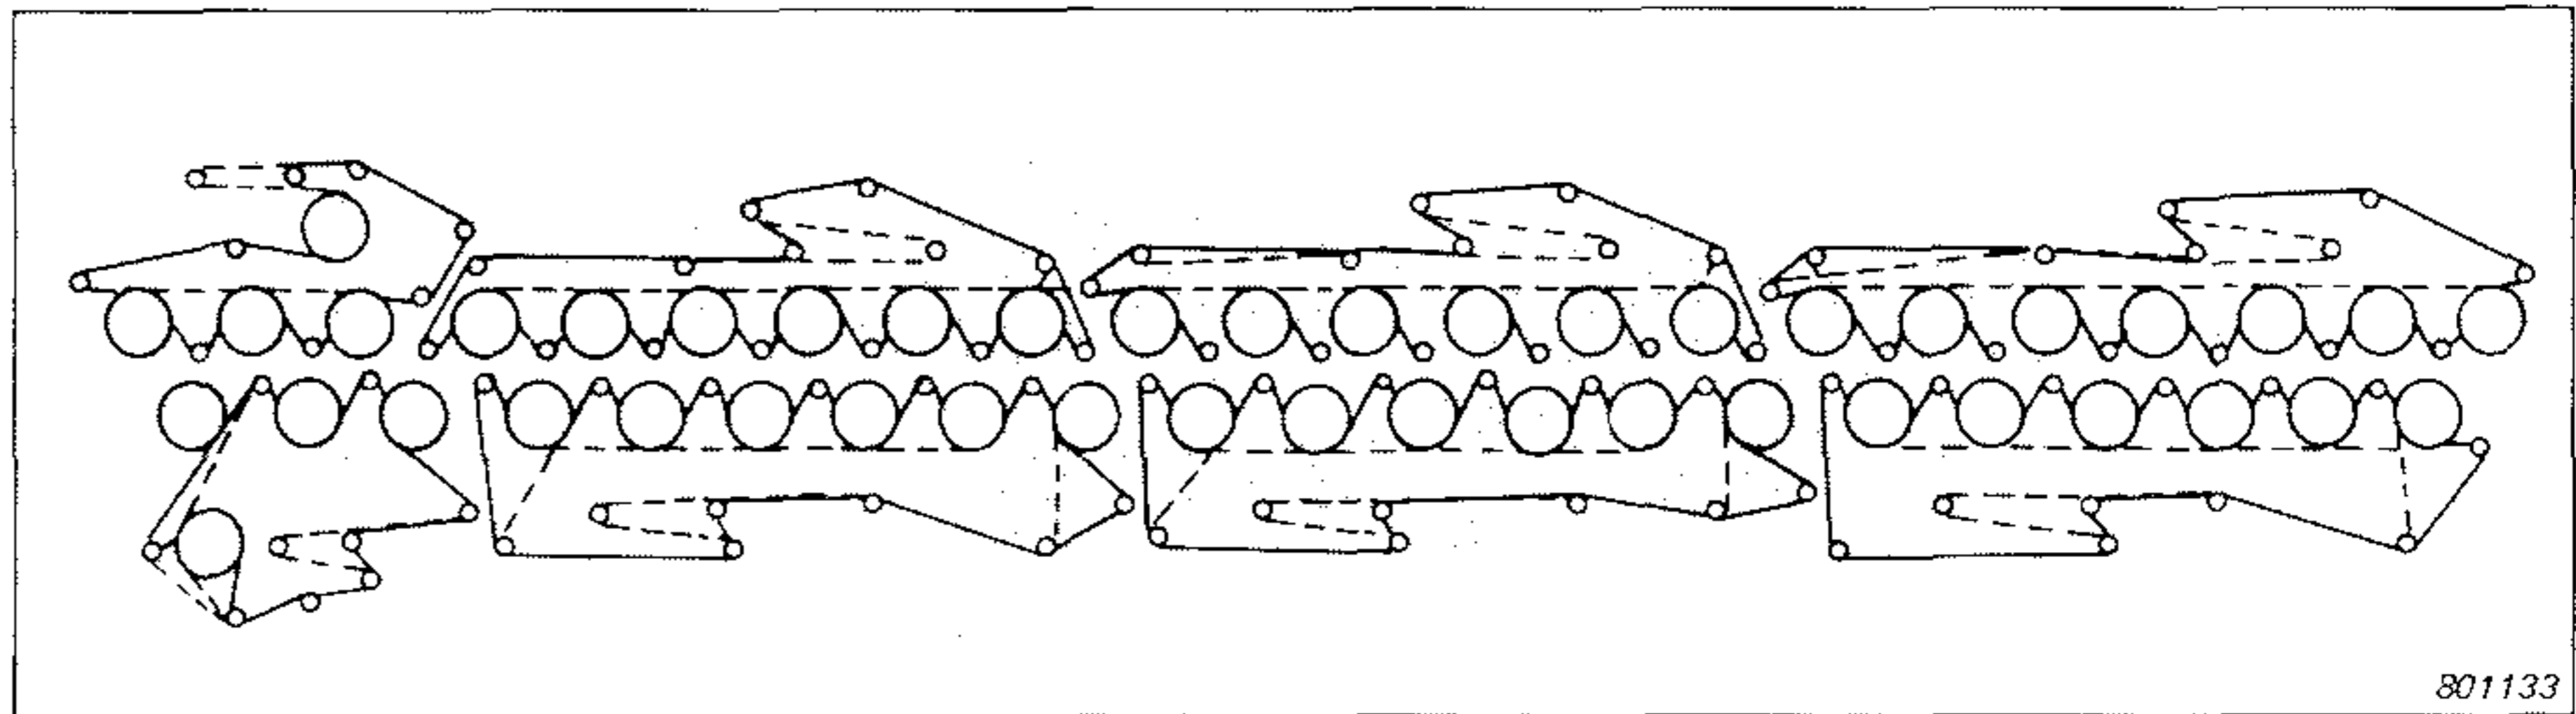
Schematic diagram of a paper machine showing the large number of rollers and consequently the even larger number of bearings involved
